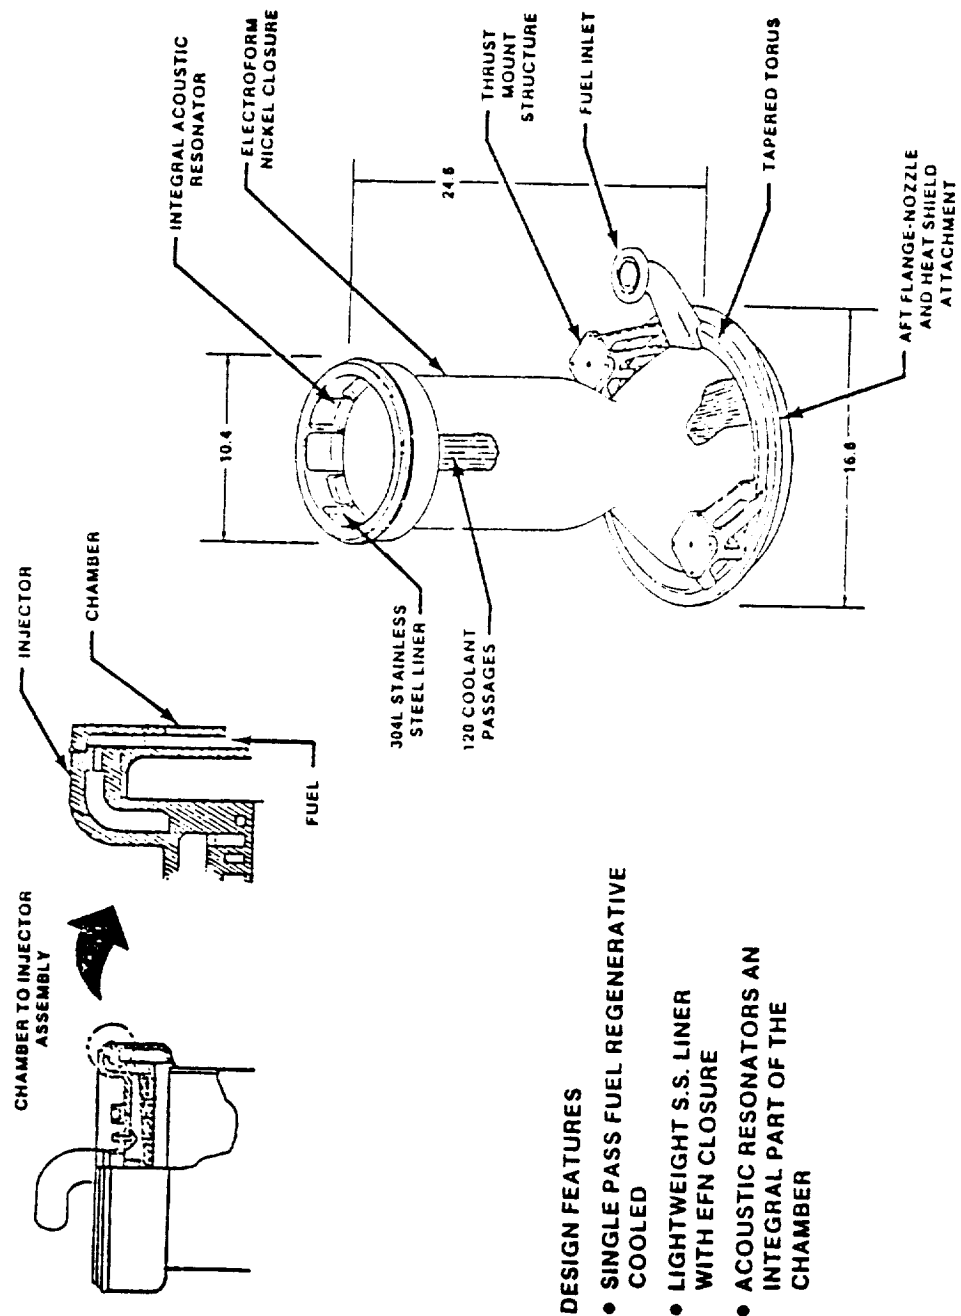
COMBUSTION CHAMBER ASSEMBLY
